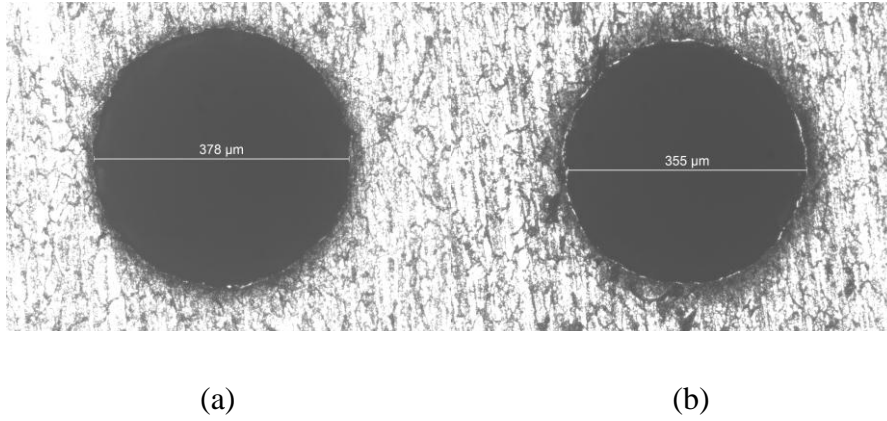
Hole top (a) and bottom (b) diameters on steel plates drilled with tungsten carbide electrode
